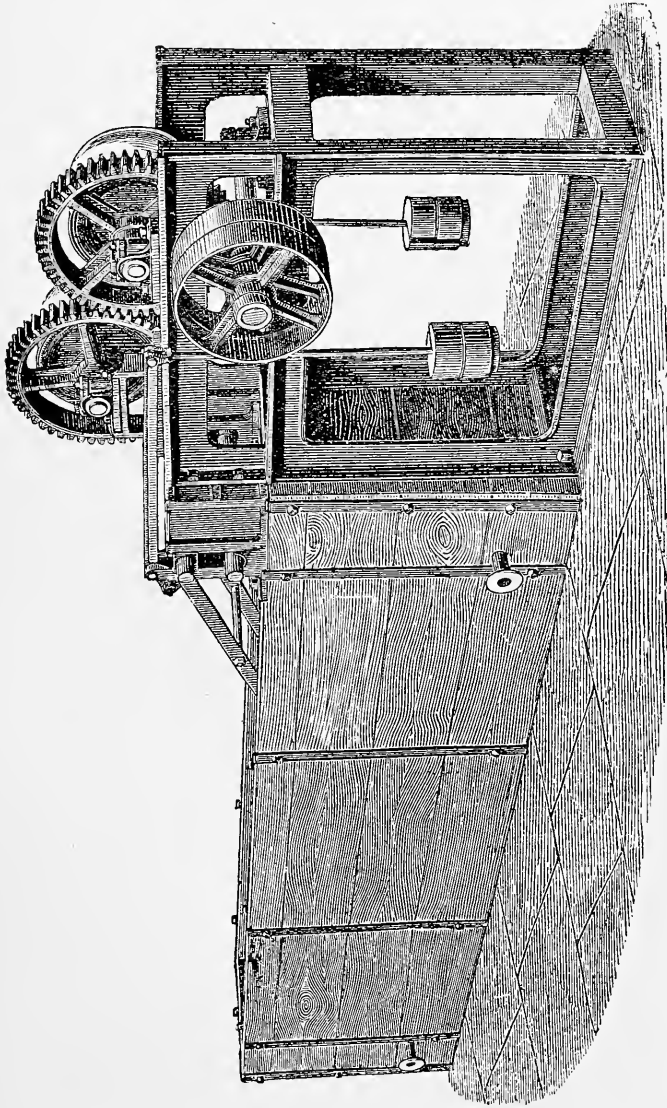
Yarn tarring machine. (Made by Thomas Barraclough, London.)
